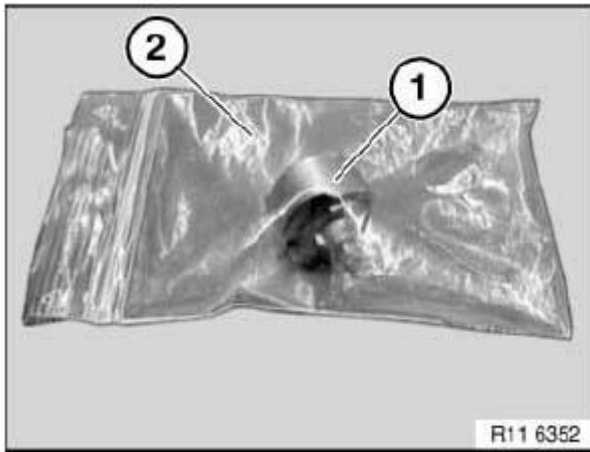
Identifying Magnet Wheel And Plastic Bag
